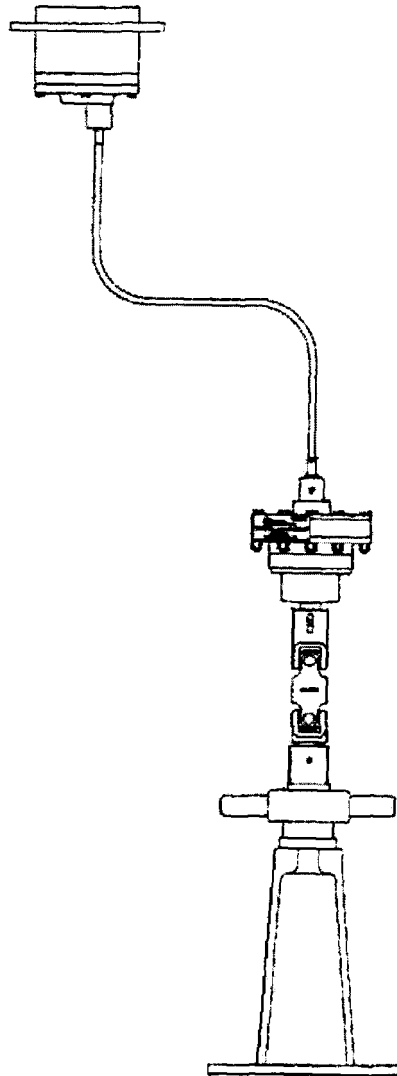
ROTARY FLEXIBLE SHAFT SYSTEM (UNIFLEX)
